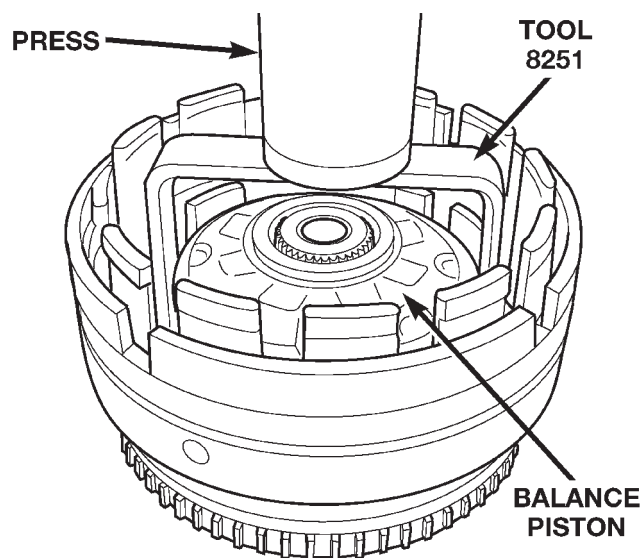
Compressing UD/OD Balance Piston Using Tool 8251
